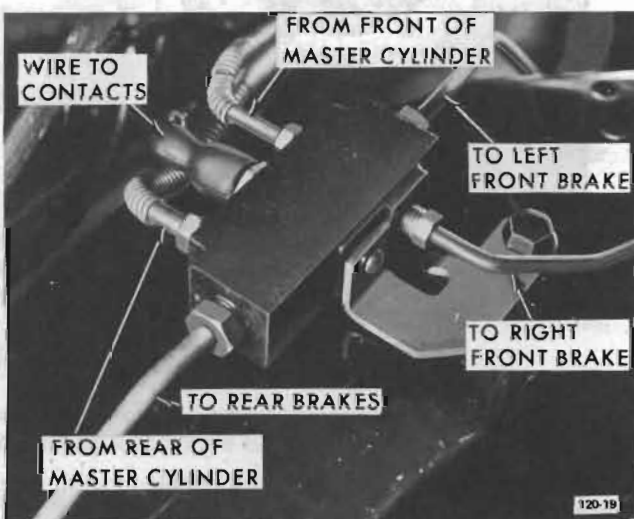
Distributor and Brake Failure Warning Switch Assembly - Drum Brakes
